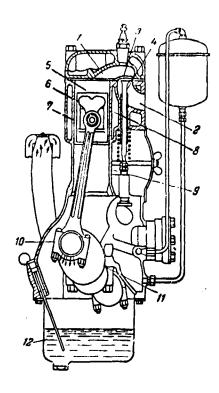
Typical running temperatures in carburetor engine [12]: 1) combustion chamber 2200-2480°C; 2) exhaust gases 540-870°C; 3) exhaust valve head 425-815°C; 4) exhaust valve stem 150-540°C; 5) head of piston 205-425°C; 6) piston-ring zone 150-315°C; 7) piston skirt 95-205°C; 8) cylinder wall (top) 95-370°C; 9) cylinder wall (bottom) 10-150°C; 10) connecting-rod bearings 95-205°C; 11) main bearings 65-175°C; 12) crankcase oil 35-150°C.
